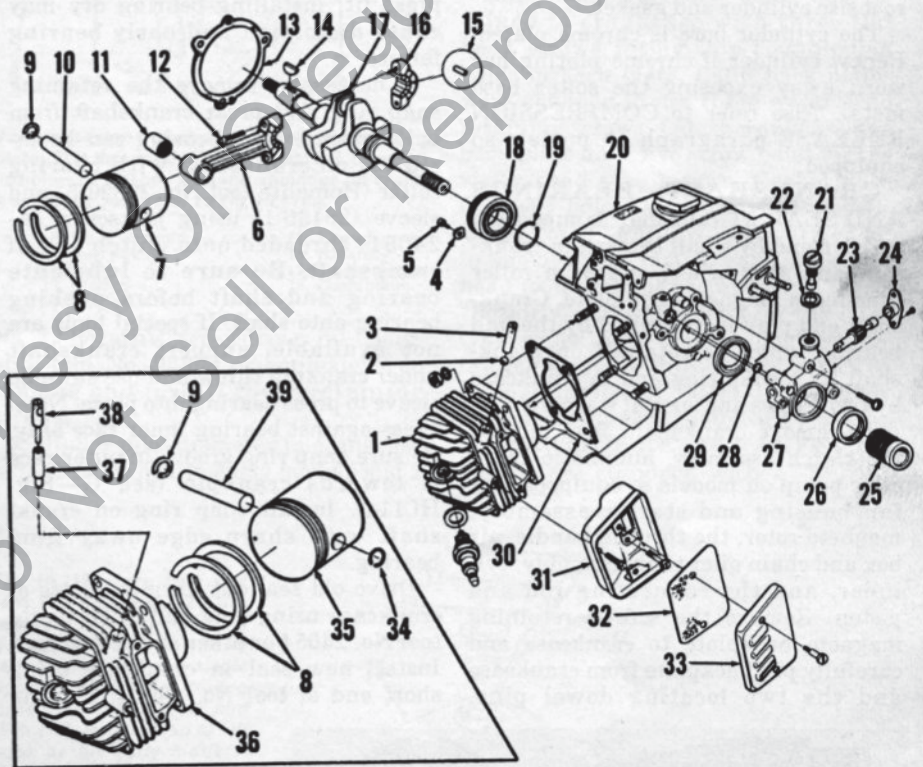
Exploded view of typical XL-Series engine assembly; all models are of similar construction except that Model XL-101 does not have compression relief valve and Models XL-101 and XL-102 do not have the automatic chain oiler pump. Inset shows late type compression relief valve and piston pin retained with two snap rings instead of Spirol pin and one snap ring. Refer to Fig. HL104 or to Fig. HL107 for flywheel end main bearing which is supported in magneto backplate.
